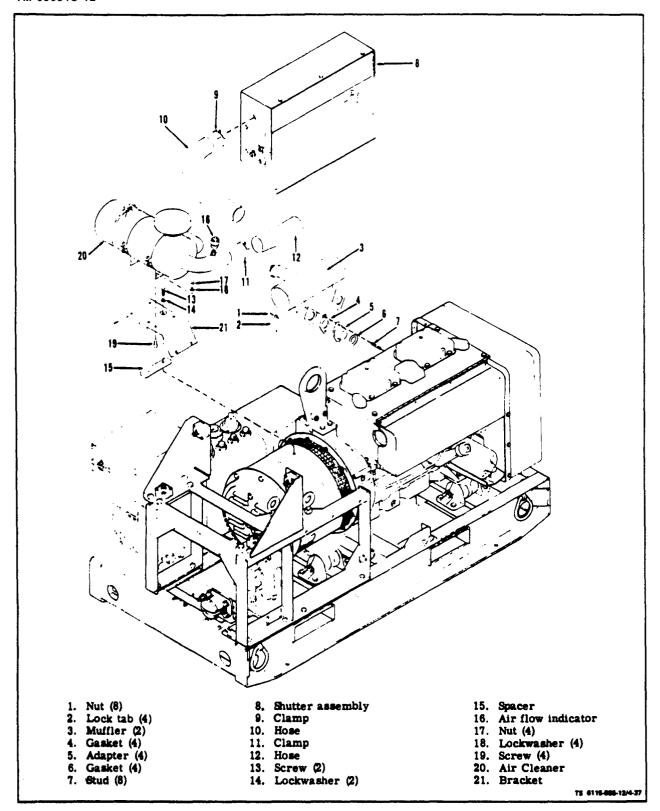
Exhaust Muffler and Air Cleaner Assemblies.
